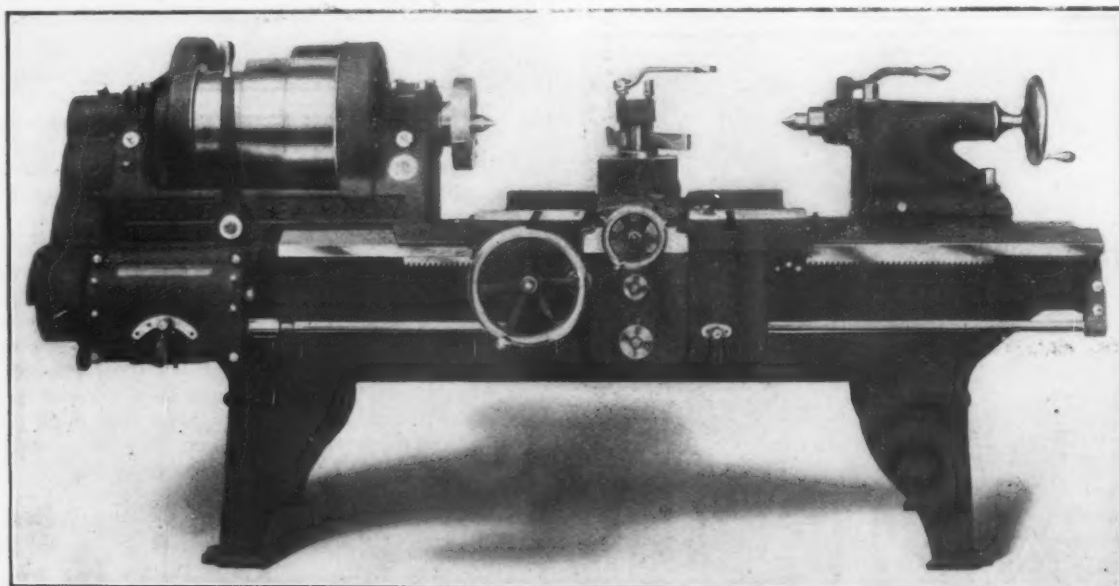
A 20-in. Heavy Duty Automobile Engine Lathe Built by the R. K. Le Blond Machine Tool Company, Cincinnati, Ohio.
